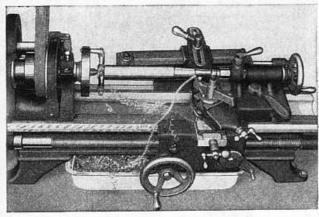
Turning a Taper on the No. 22, 9-inch Junior Lathe Equipped with Taper Attachment
